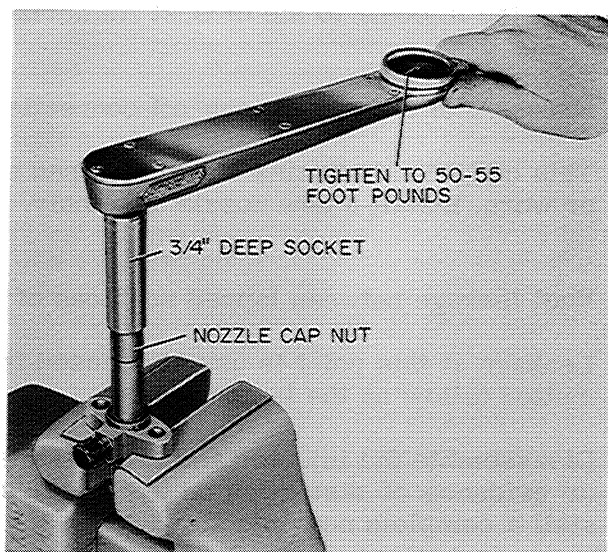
Tightening Nozzle Clamp Nut with a Torque Wrench
